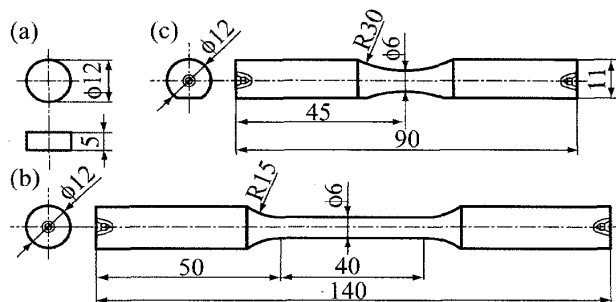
Configurations of specimens [mm]: (a) button-type specimen, (b) tensile specimen (JIS Z 2201, No. 14), (c) fatigue specimen (JIS Z 2274, No. 2)
